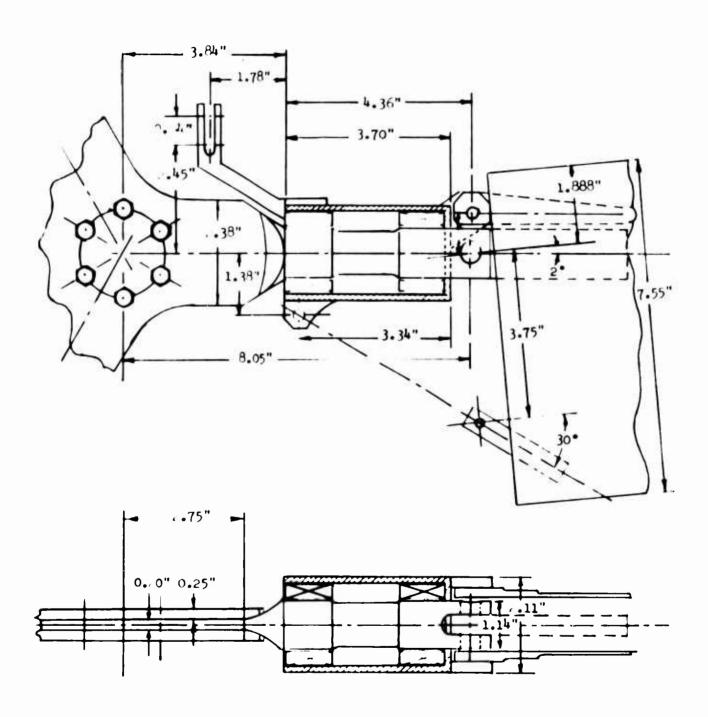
CHOMPTRY OF THE HUB-SPINDLE ASSEMBLY
